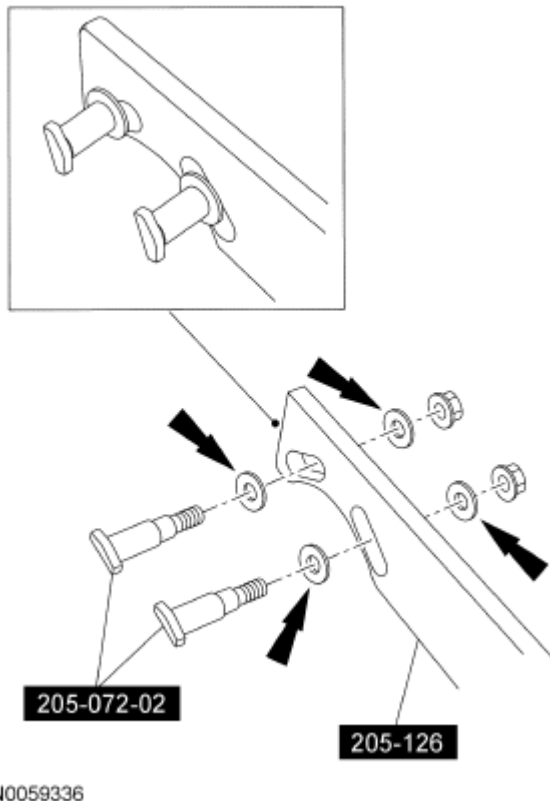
Assembling Special Tools (205-072-02 And 205-126)
